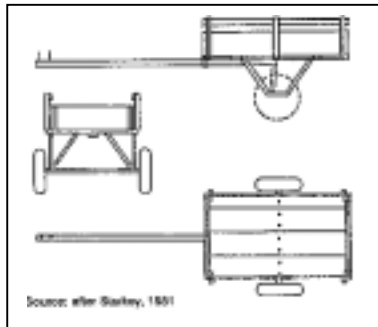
Cart design of the type widely used in West Africa, teeing teased on fixed solid steel axle, roller bearings and imported wheels and tyres. Source: after Starkey, 1981
